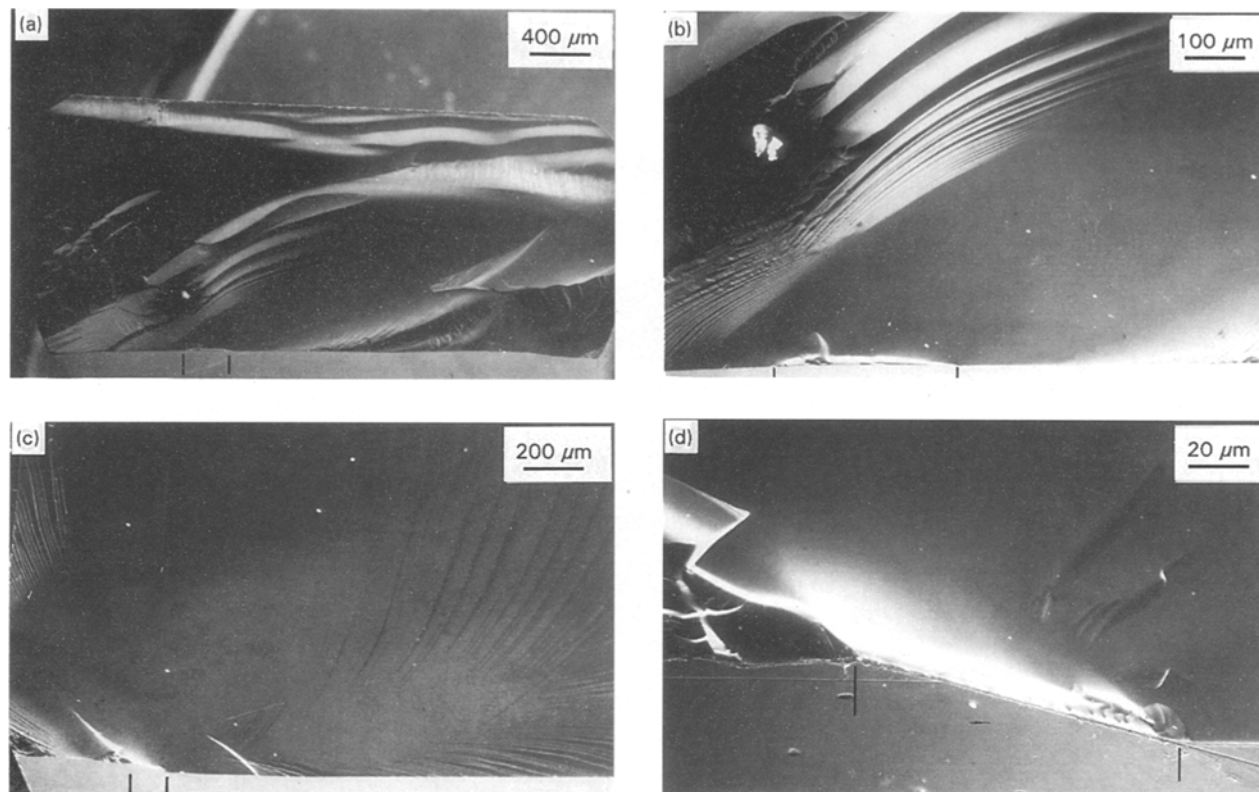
Examples of machining flaw origins in stoichiometric  $\text{MgAl}_2\text{O}_4$  crystals with a  $\{111\}$  tensile surface and a  $\langle 110 \rangle$  tensile axis. (a) Lower and (b) higher magnifications of a specimen in which the fracture origin was in the  $\{110\}$  plane resulting in a fracture toughness of  $1.0 \text{ MPa m}^{1/2}$  from a resultant strength of  $\sim 172 \text{ MPa}$  (22400 p.s.i.). (c) Lower and (d) higher magnifications of a specimen of the same orientation in which the failure initiating flaw is not on the  $\{110\}$  plane, yielding a substantially higher fracture toughness of  $1.5 \text{ MPa m}^{1/2}$  and strength  $\sim 260 \text{ MPa}$  (37200 p.s.i.).
